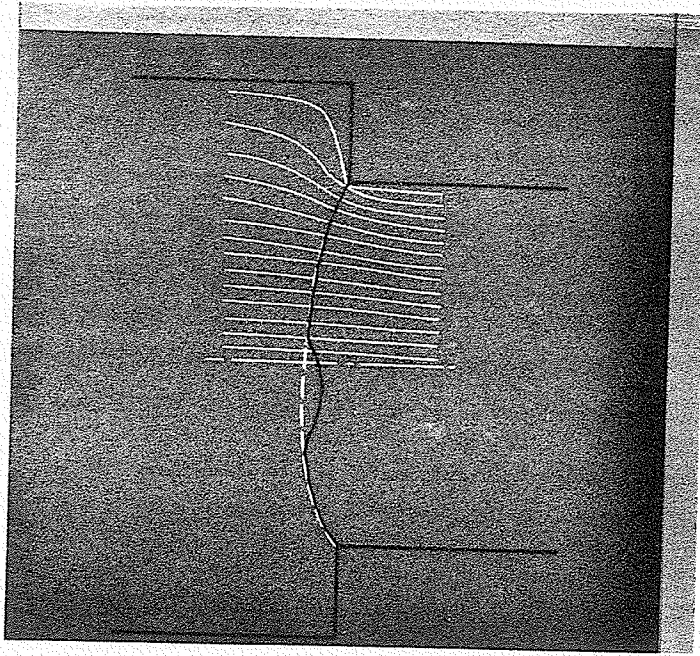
Fatigue failure in sharply filleted sections tend to follow the zone of highest stresses (10)
